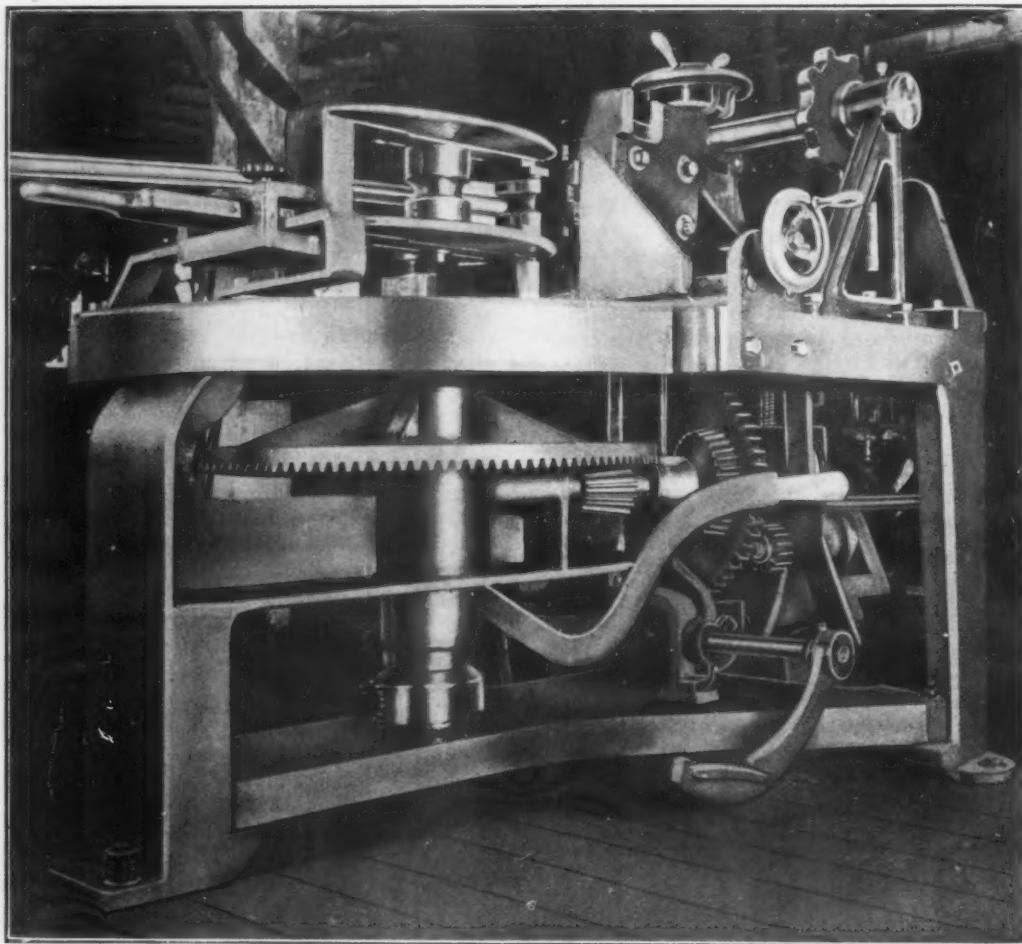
A Machine for Making Radial Bends Built by J. Fillmore Cox & Co., Bayonne, N. J., Shown Without the Rear Extension.
